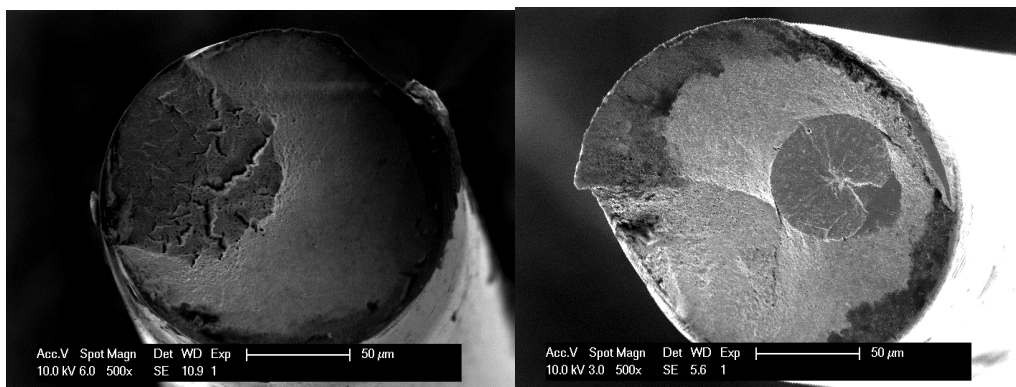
Fracture modes: (a) Surface crack, (b) Internal crack.
